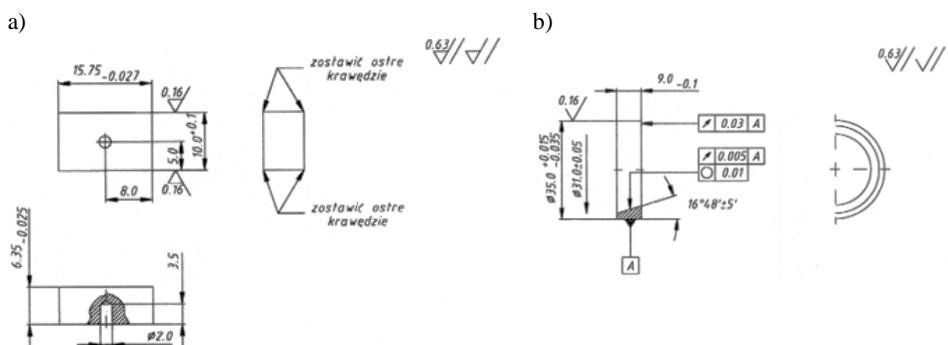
The dimensions of (a) specimen, and (b) counter-specimen
